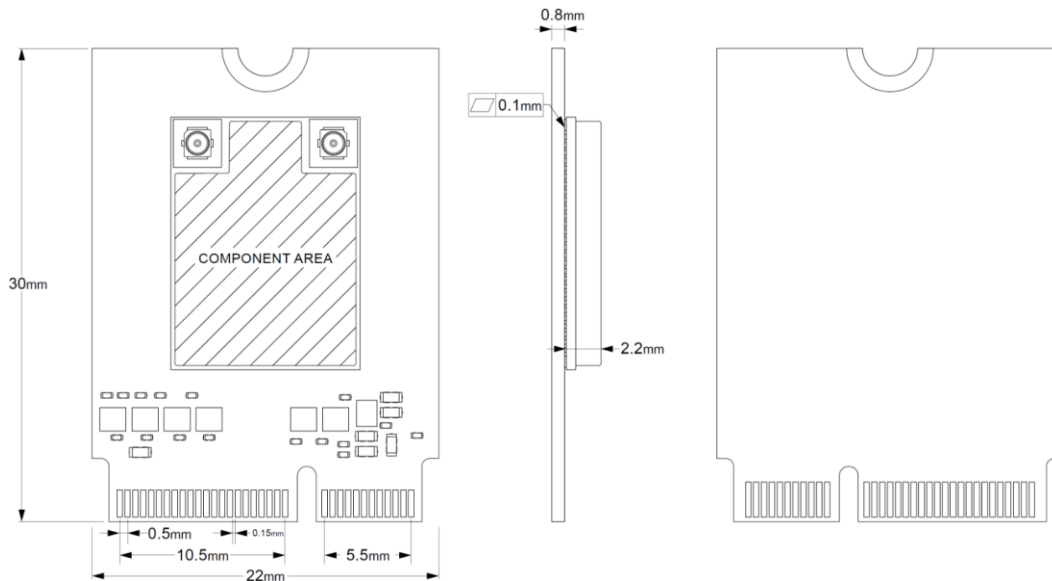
M.2 Key E 2230 Carrier Board Dimension
